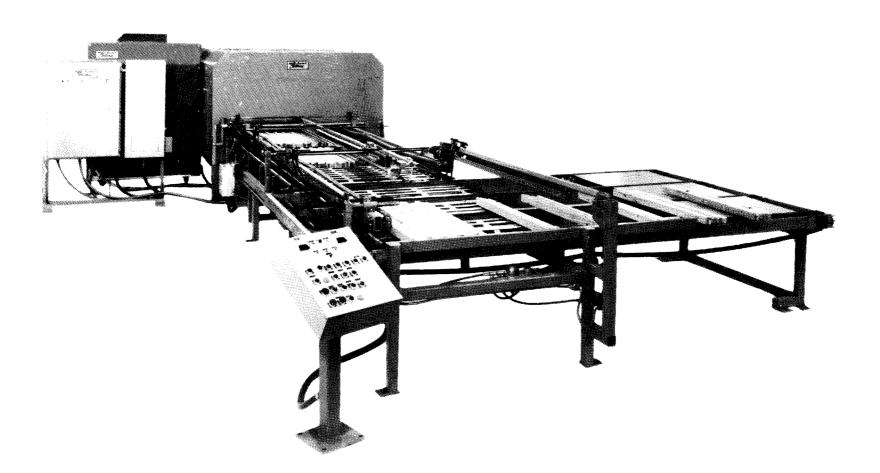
A view of the infeed conveyor, the glue spreader, the layup table, the shielded press and generator for an edge bonding machine. The infeed boards are of different heights. Photo courtesy of Mann-Russel Electronics, Inc.
